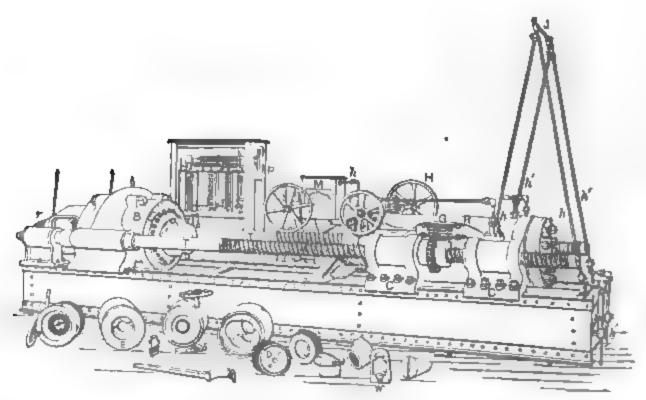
EMBRY HORIZONTAL MACHINE.
